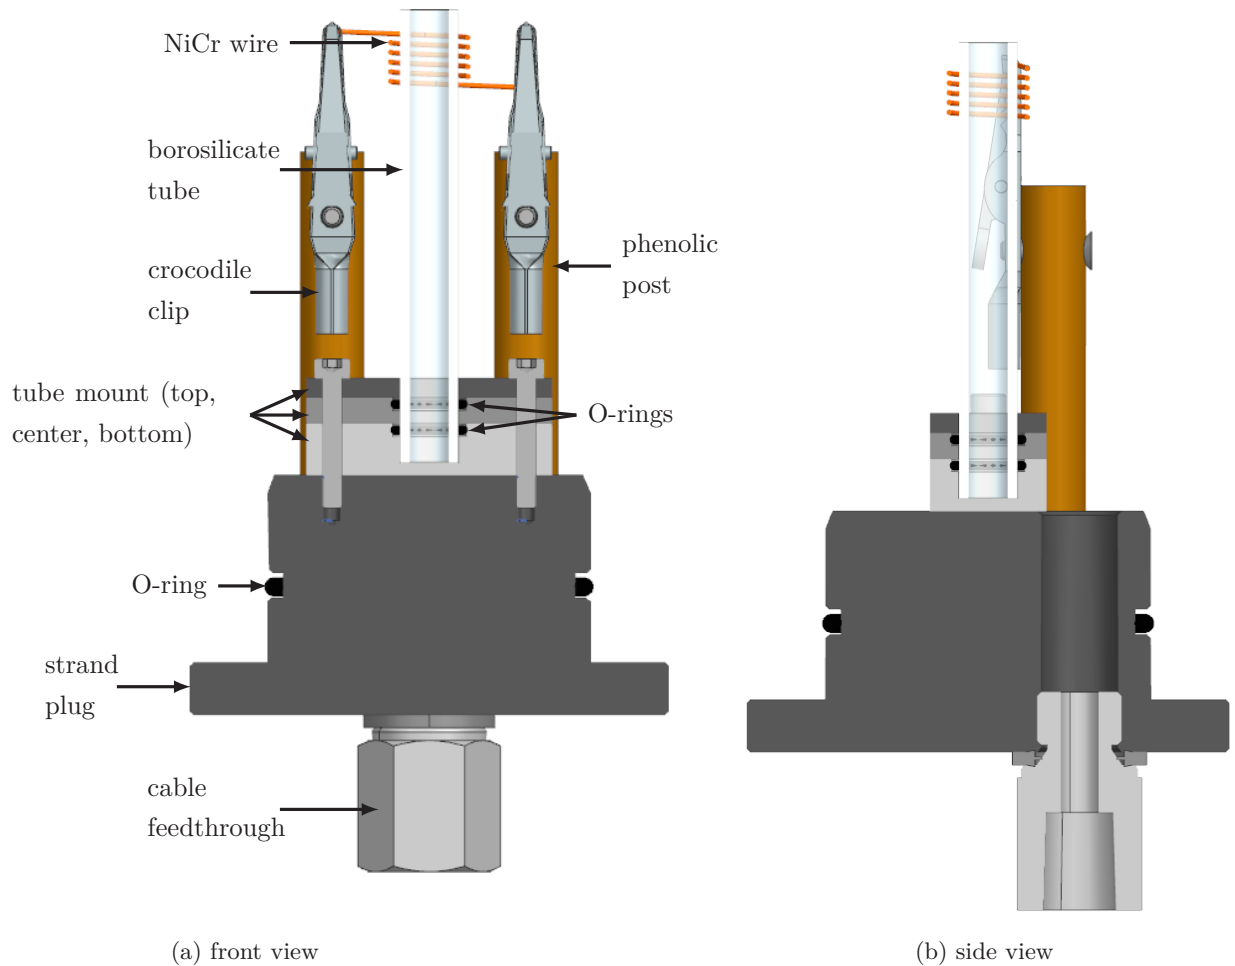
Front cut view and side cut view of the strand plug that is inserted into the combustion chamber.
